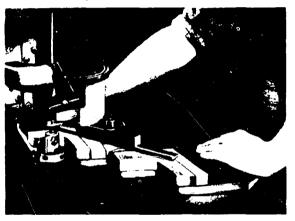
illustrates a standard routing jig for machining solid wood handels on both sides by using a rounding cutter. The pair of workpieces is secured with a screw clamp on the jig. The space the cutter has worked on the jig base is clearly visible. The feed is controlled by the former pin in the normal way. The first stage is on the left.
